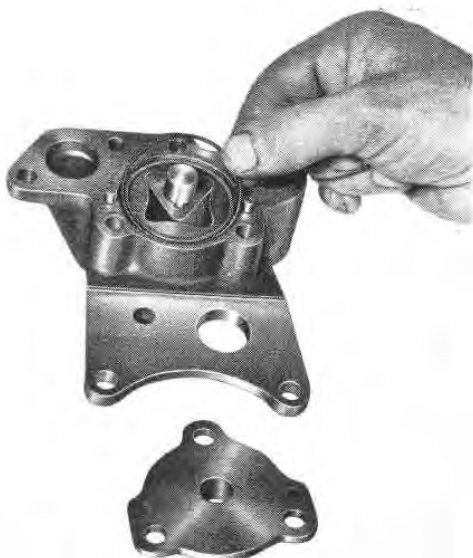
Removing the 'O' Sealing Ring from the Oil Pump
